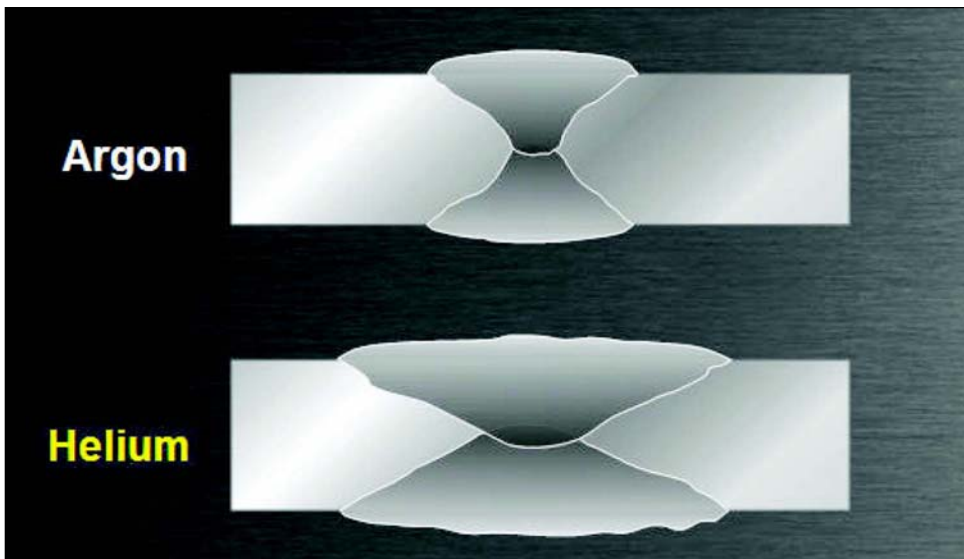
The Characteristics of the Two Primary Shielding Gases Used for GMAW Aluminum Welding
